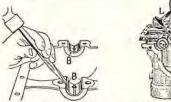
(left). Removing old babbitt. Fig. 17 (right), Pouring the babbitt into upper main bearing seats.
